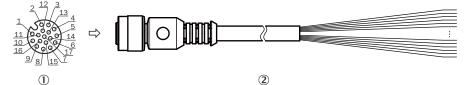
Adapter cable, e.g. part no. 2070425 (3 m)
